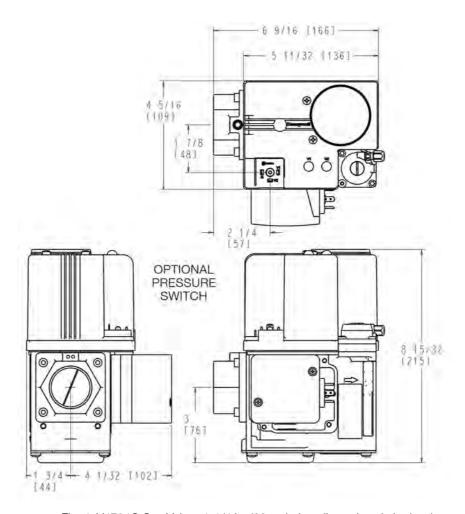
V4734C Gas Valves 1-1/4 in. (32mm) size, dimensions in in. (mm).
